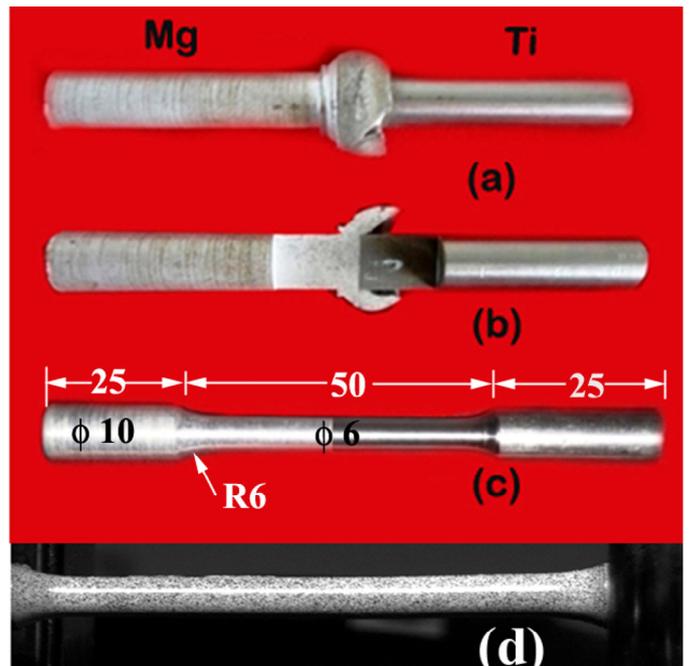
(a) Mg-Ti Joints, (b) Mg-Ti Joints (cross sectional view), (c) photographs of tensile specimens before testing (d) specimen prepared for DIC test.
